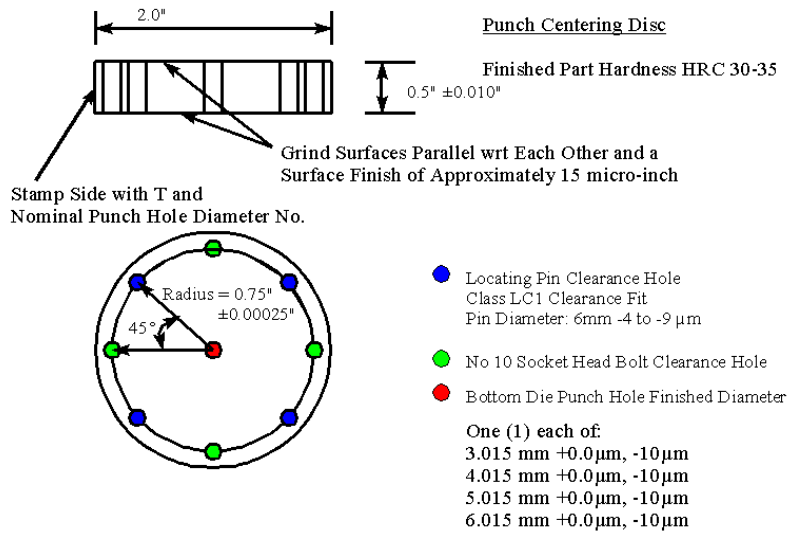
Schematic showing the general dimensional design requirements of the punch centering discs fabricated for the shear punch test fixture.
